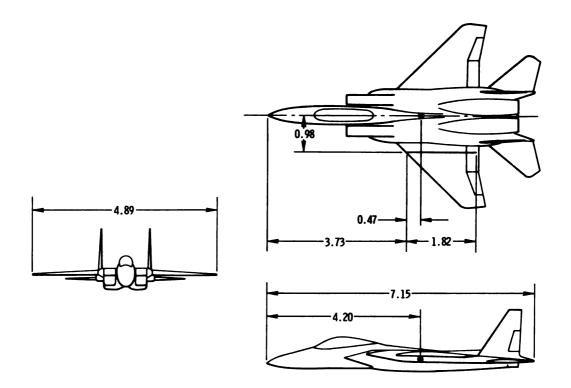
Three-view drawing of 3/8-scale-model F-15. Dimensions in meters.
